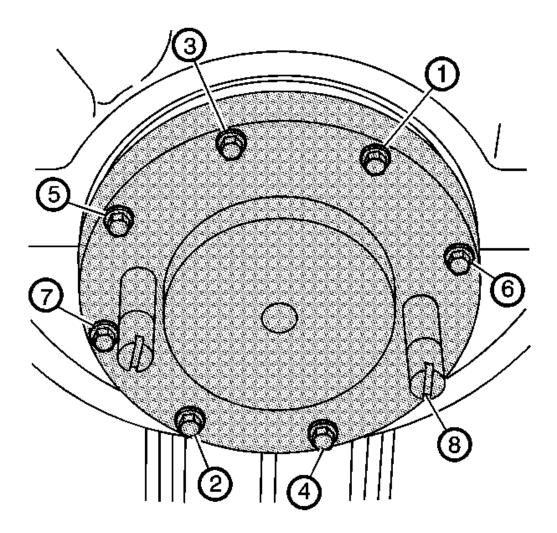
View Of Guide Pins In Crankshaft Courtesy of GENERAL MOTORS CORP.
